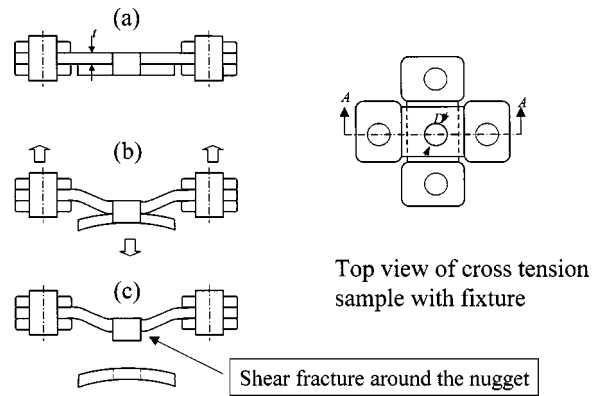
Global deformation pattern (b) and the weld nugget pullout failure (c) of a cross tension sample
